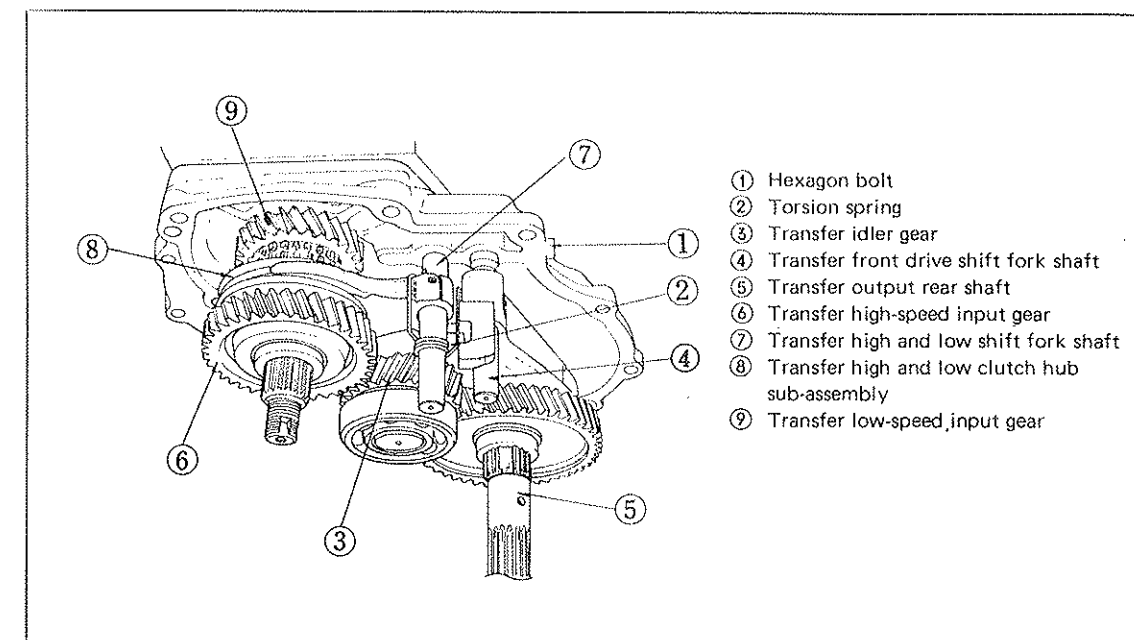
Removal of Gears and Shift Fork Shafts
